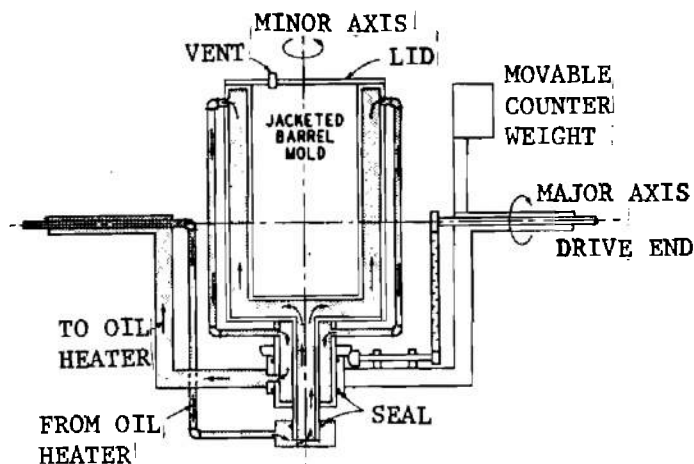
Typical Arm Layout of Open-end Mold on Jacketed Mold Machine<sup>2</sup>
